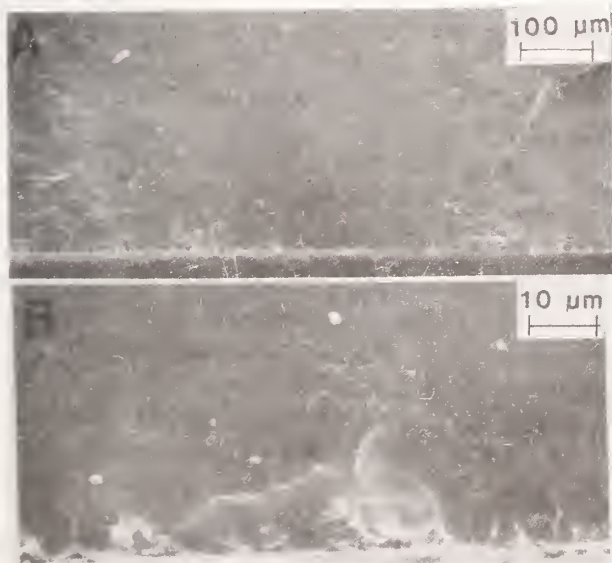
Example of a failure initiating flaw for machining parallel with the tensile axis of a hot pressed boron. A) lower magnification
